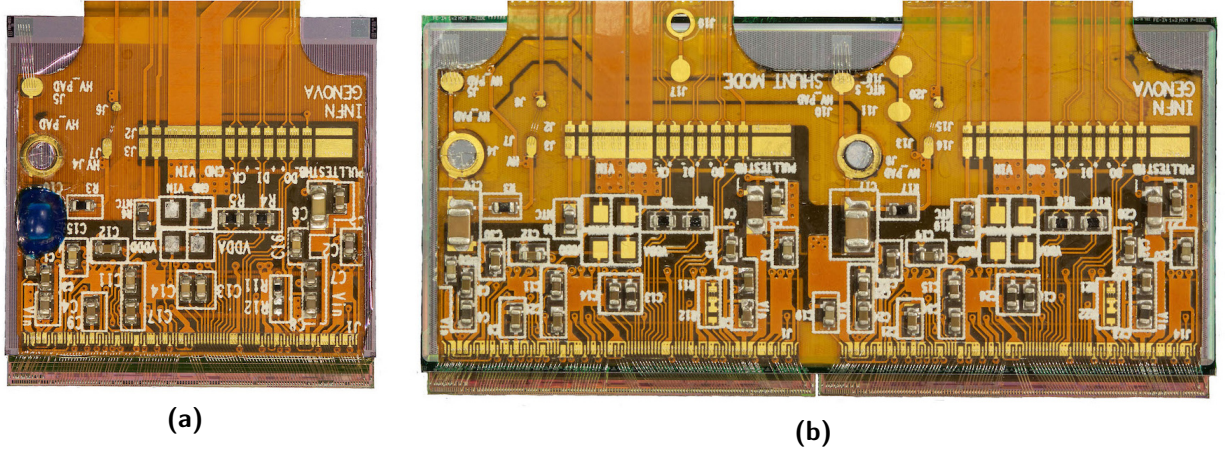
Photographs of a dressed IBL single chip module (a) and a double chip module (b). The flex extension visible on the top allows testing of the module before loading on stave. It is cut during the stave loading procedure at a cutting line slightly above the bare module.
